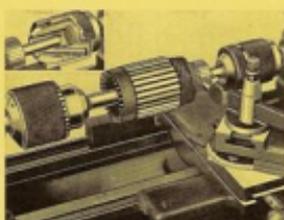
Centrifugal Armature Mounted in Lathe using Tailstock Adjustable Bushing.
